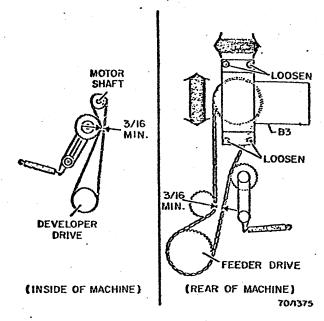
Developer/Paper Feeder Drive Motor Adjustment
